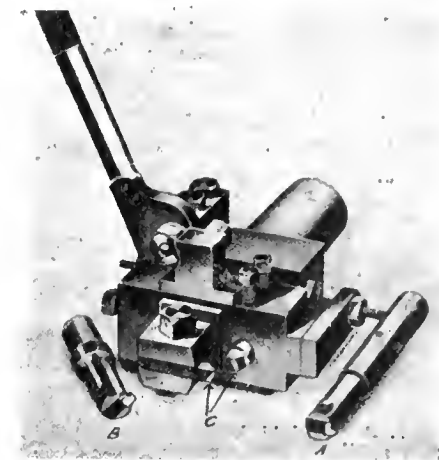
ASSEMBLY OF COMBINATION RECESSING AND FACING TOOL.
